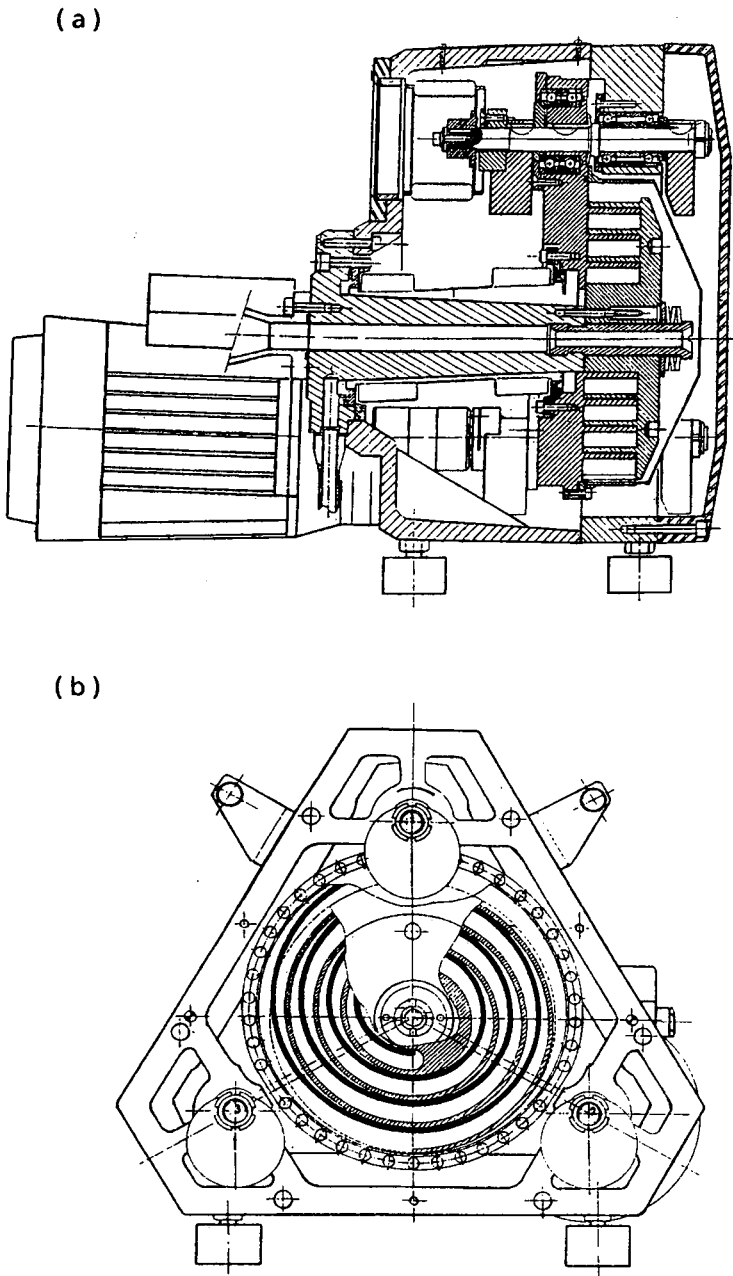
Cross-section of pump showing (a) the flow path and (b) the vane assembly (courtesy of Normetex America, Inc., USA).
